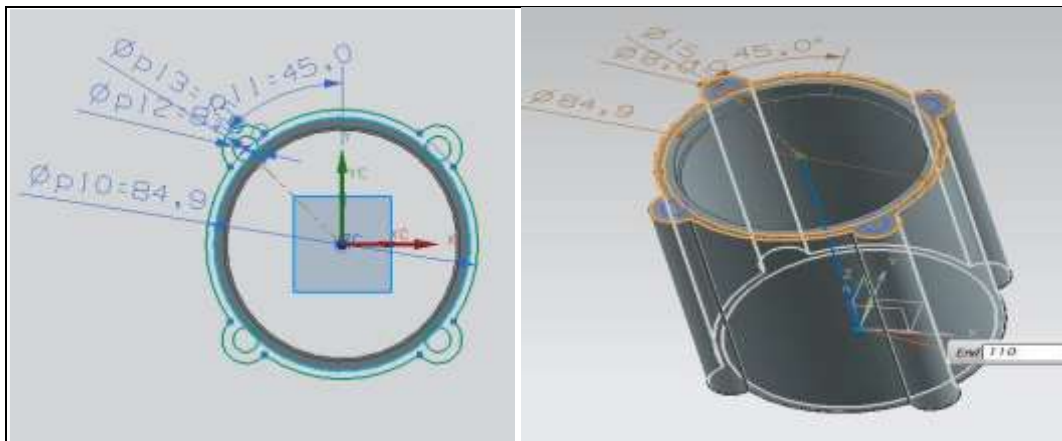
2D Sketch and Extrusion of Inline Boxer Motor
